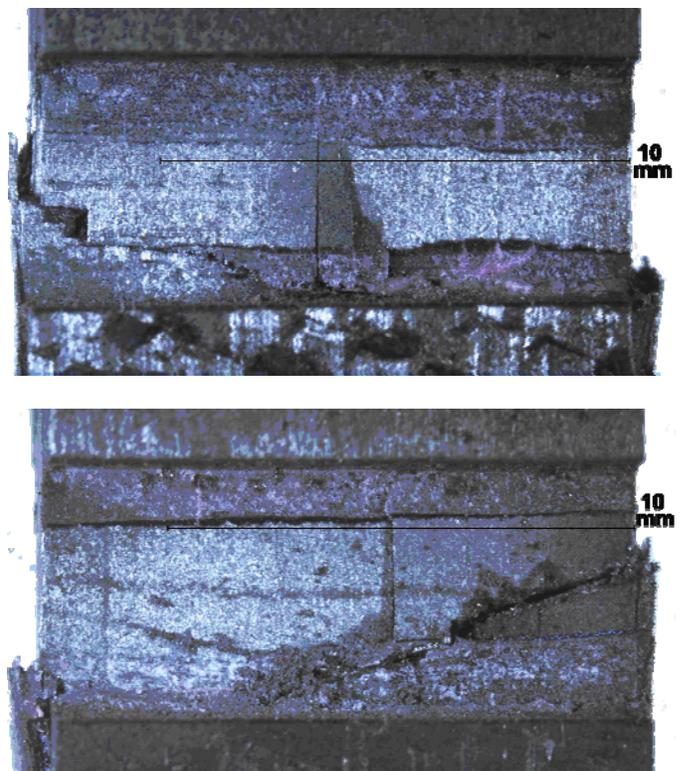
Two opposite views of fracture zone of one specimen after compression test
